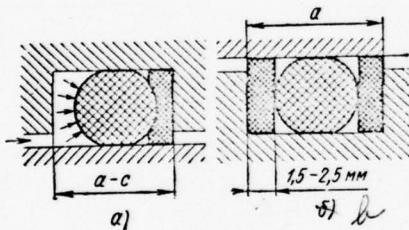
Packing/seal with rubber rings with shielding adapters.
